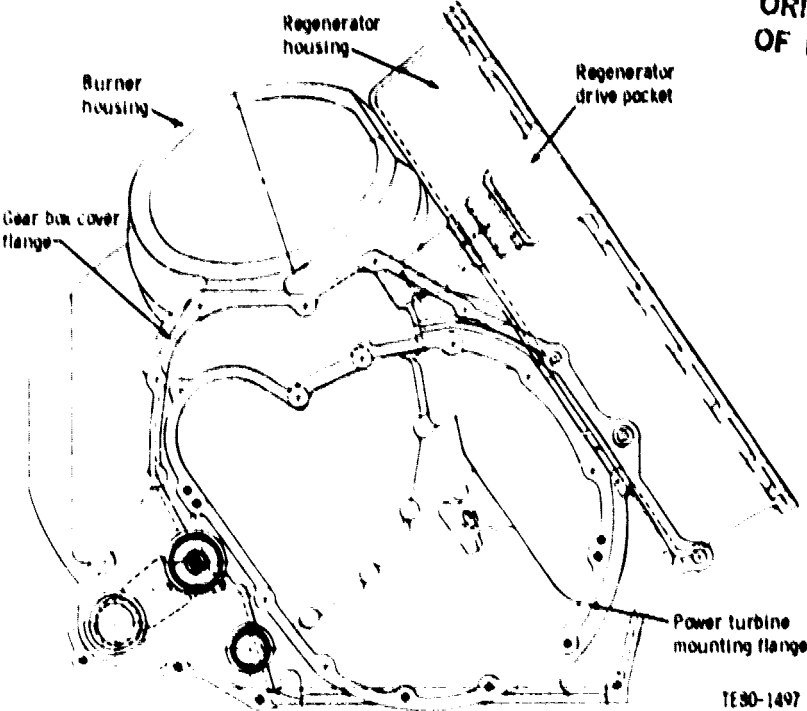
AGT-100 Engine Block--View Into Gearbox Housing.
